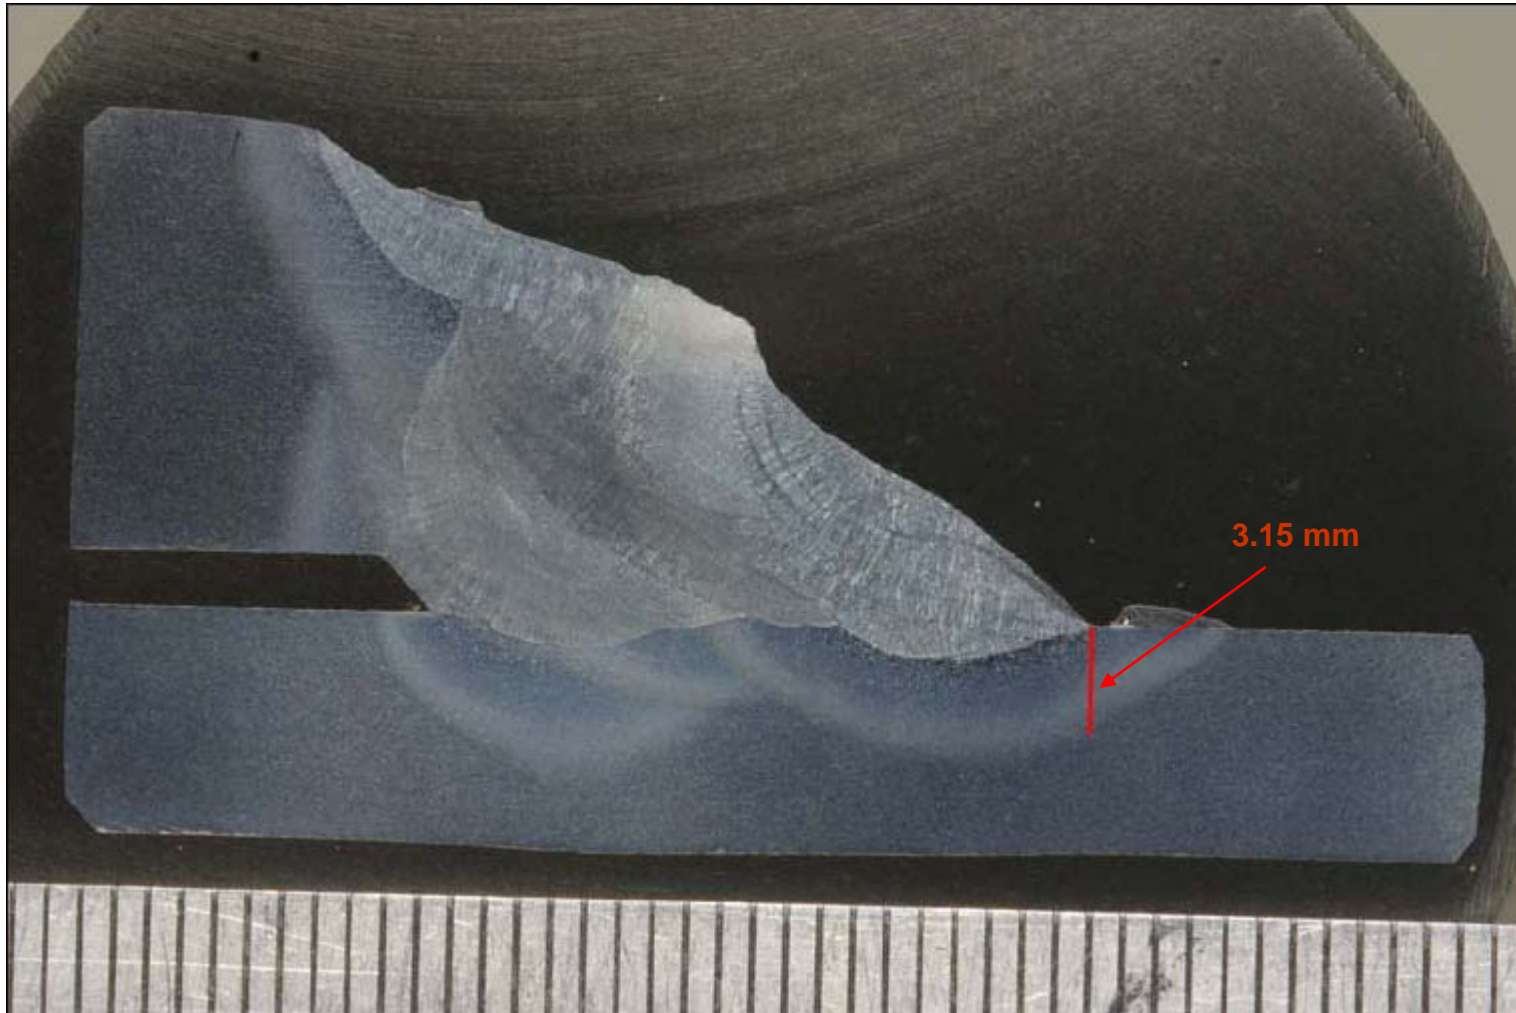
Fillet Weld Section and HAZ Depth at 12:00 Position
